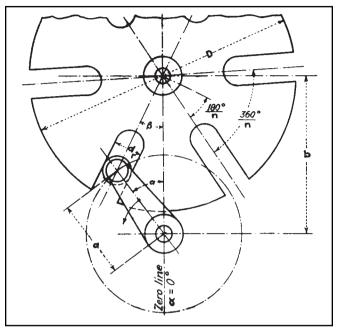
A schematic drawing of a six-slot geneva wheel. Roller diameter,  $d_r$ , must be considered when determining D.
